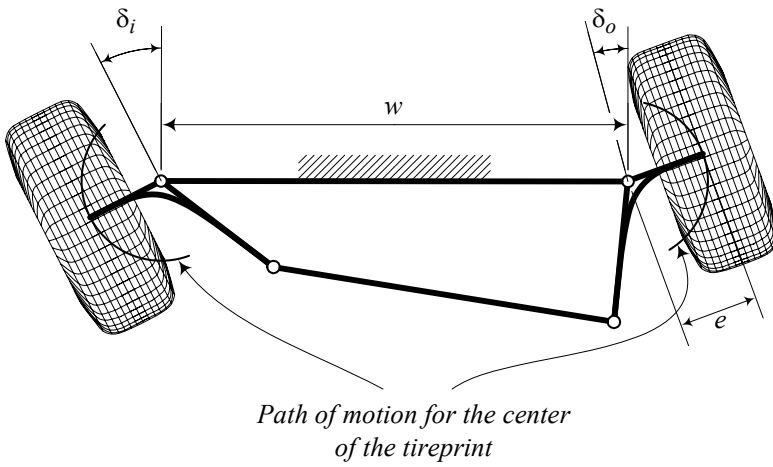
Offset attachment of steerable wheels to a trapezoidal steering mechanism.
